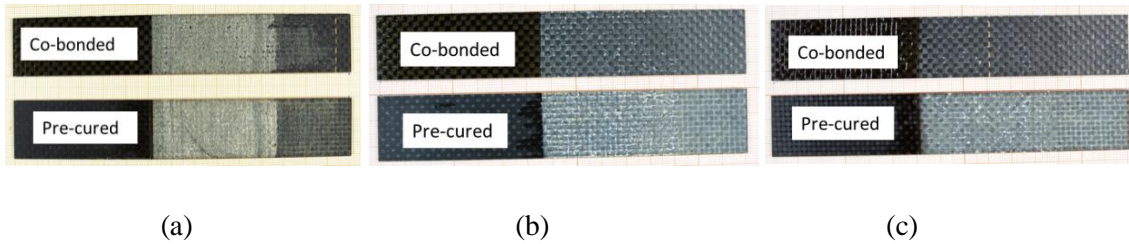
Fracture surfaces of bonded joints with adhesive film F2 with different pre-bond moisture contents: (a) 0 %; (b) 0.33%; and (c) 1.25%, tested at 80°C.
